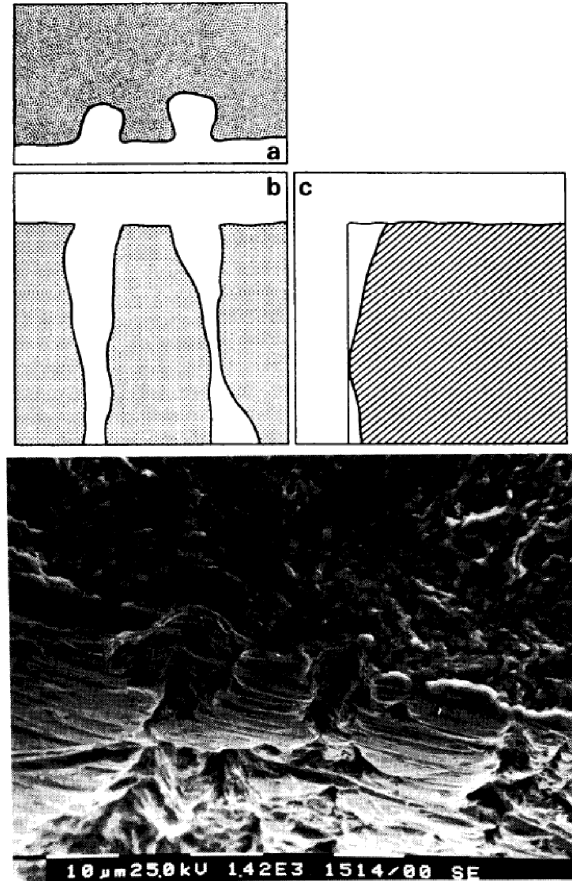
Two grooves as a crack origin. At the top of the figure, (a) the fatigue crack fracture plane, (b) the wire surface and (c) a section through the defect are shown schematically [78].
